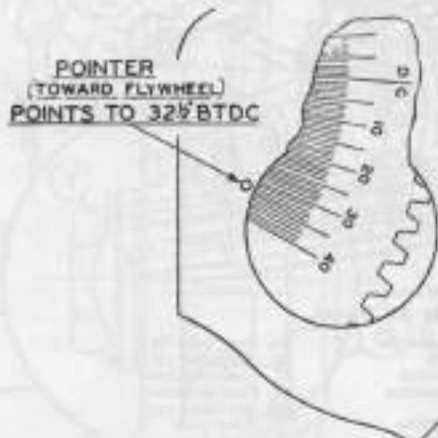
Massey-Harris model 55 tractor engine flywheel marks.
